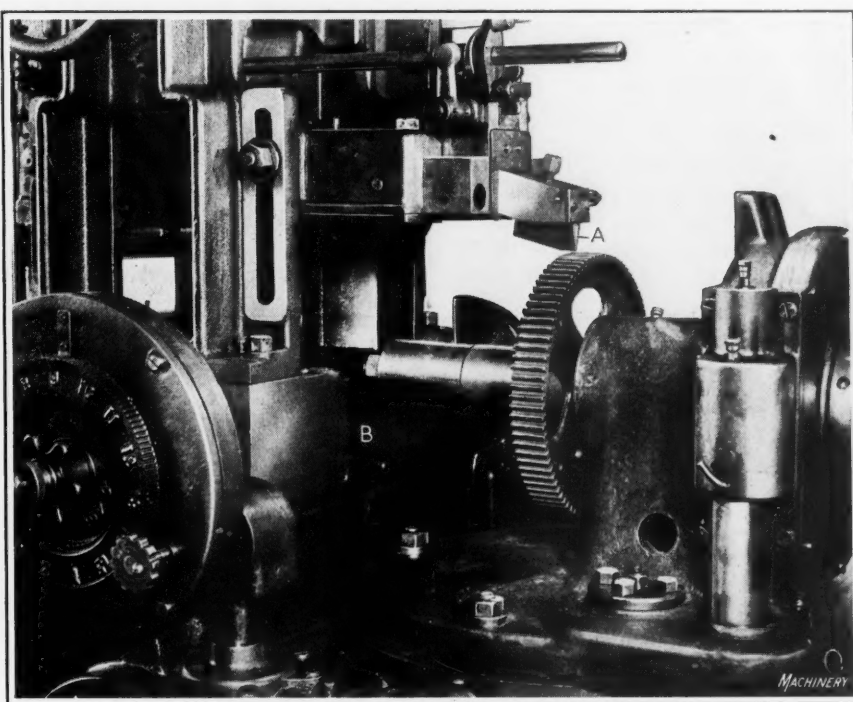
Gear Planing Machine which generates the Teeth as the Tool, representing a Rack Tooth, feeds laterally
